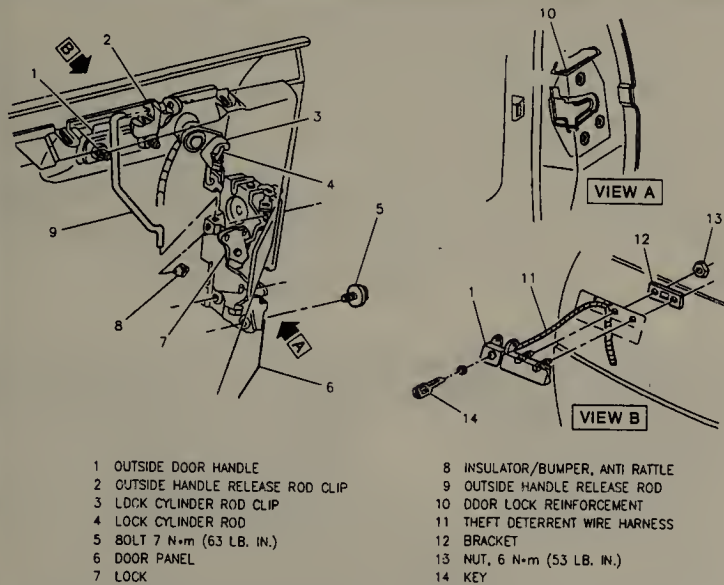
Exploded view of the door lock assembly—1996 vehicle shown, others similar
